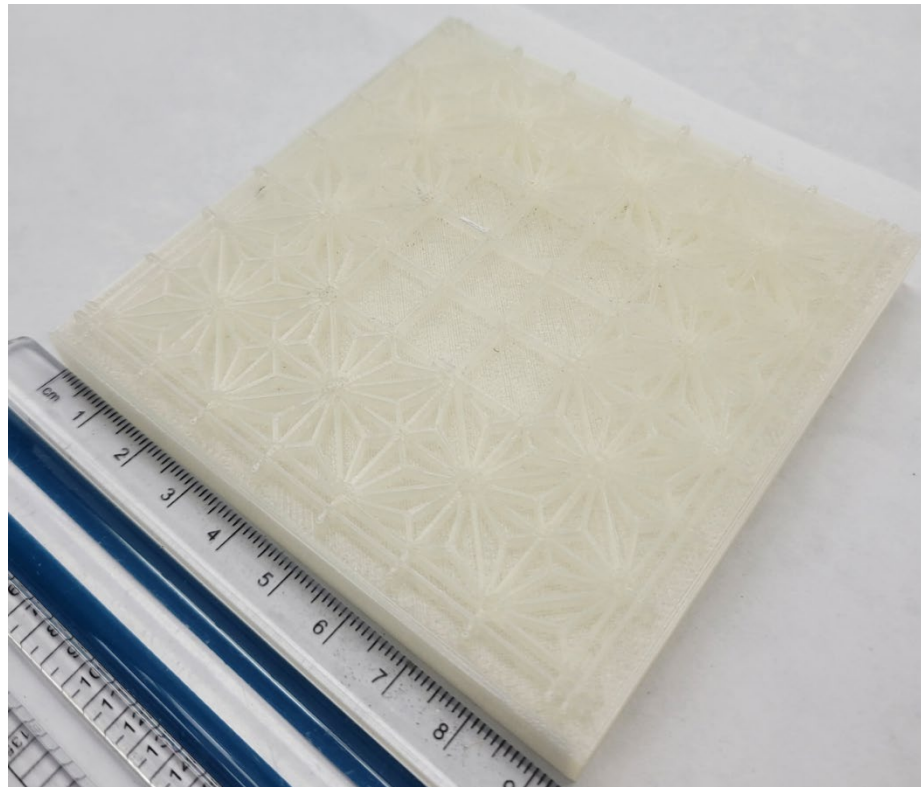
Image of the 3D printing support for DIW double-sided samples. Square inlays serve as rests for 3D printing on the first side while the second side is being printed. During the printing process, the sample is secured to the sample holder with tape.
